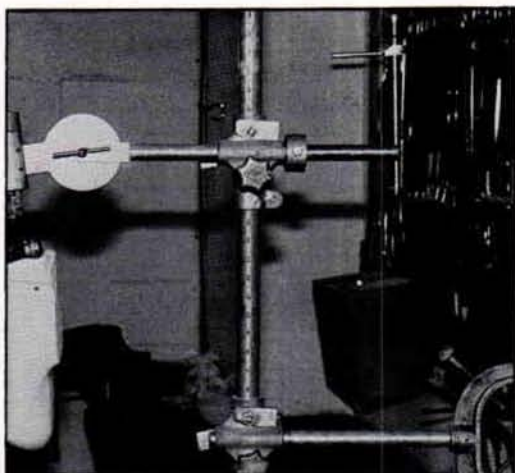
Universal Positioning Arm installed in the Vertical Fabrication Machine with a below-knee socket model held in place as for establishment of bench alignment and distal buildup prior to vacuum forming. The two locking rings insure that changes in rotation will not lead to inadvertent linear changes.
